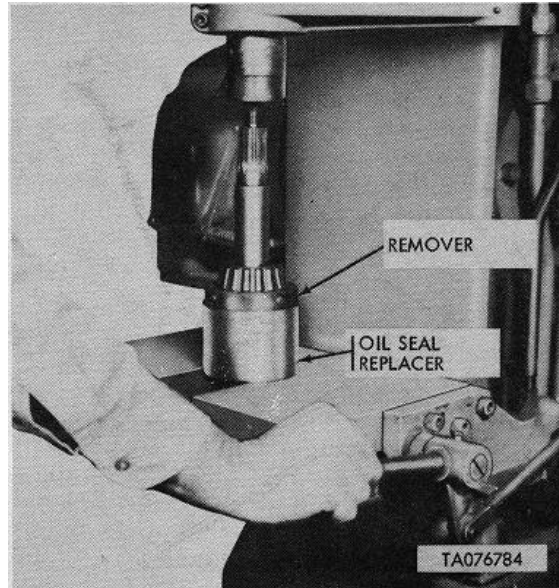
Pinion Shaft - Inner Bearing Cone Removal Using Remover with Oil Seal Replacer
